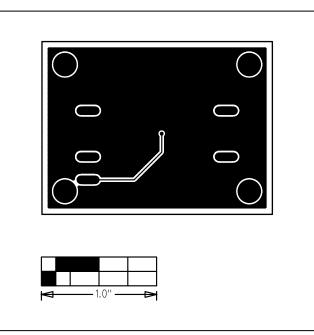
MAX9928 EV Kit PCB Layout—Solder Side
